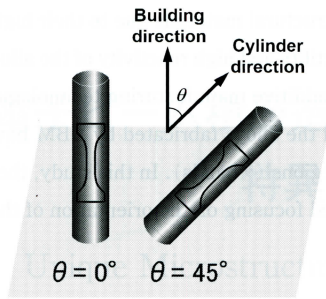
Schematic drawing of cylindrical bars fabricated by EBM<sup>(21,22)</sup>.
